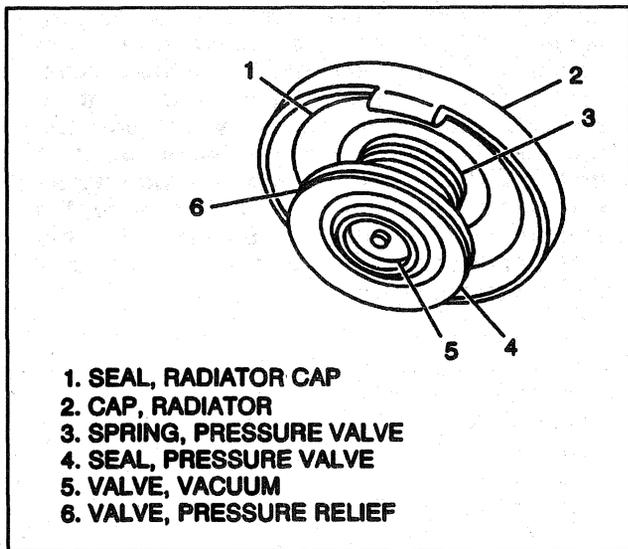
Radiator Pressure Cap Pressure and Vacuum Valves
